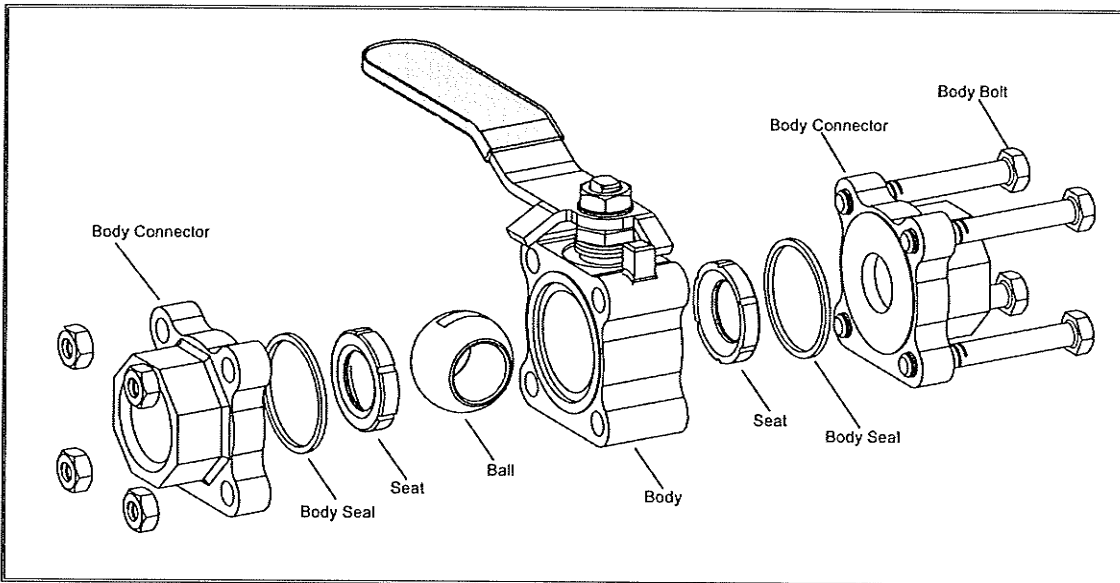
Schematic drawing of the flow control ball valve assembly (Habonim®).
